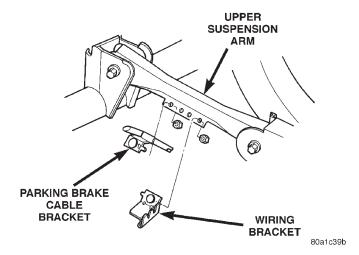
Parking Brake Cable/Bracket And Wiring Bracket
